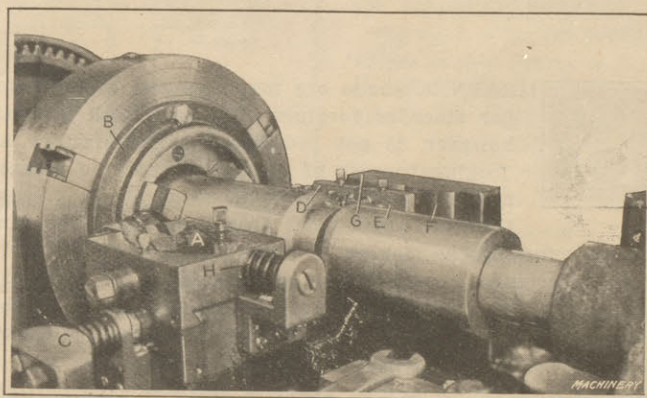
Cutting the Rifling Band Groove with a Special Grooving and Ribbing Attachment on an Engine Lathe
